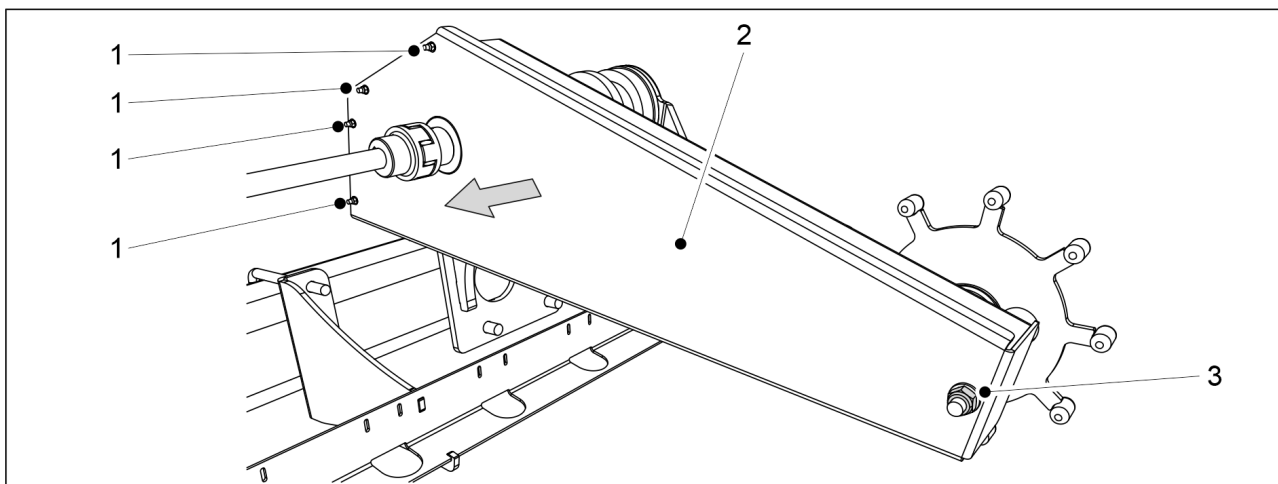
241. Cover of the wheel drive housing
